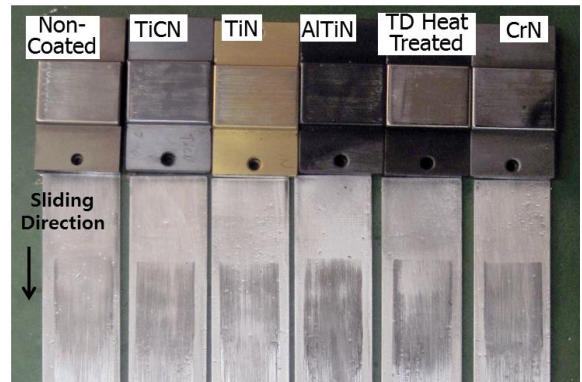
Photo of tool surface and specimens after friction test (250℃, Contact pressure: 7 MPa)
